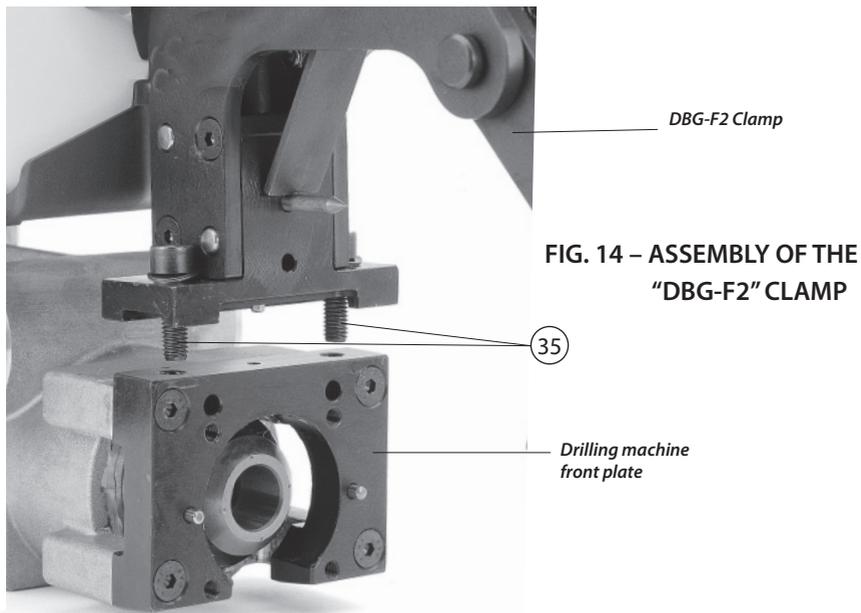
ASSEMBLY OF THE "DBG-F2" CLAMP
